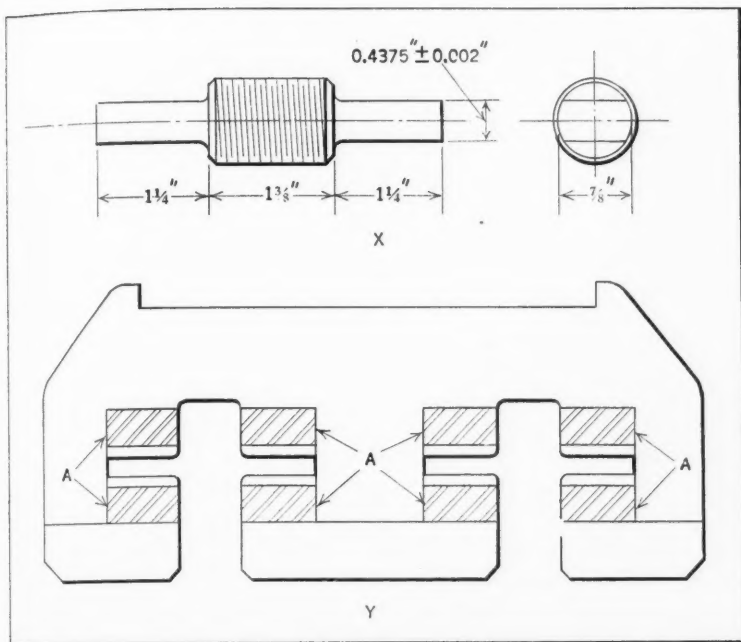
Drawing of a Front Shackle Pin Used in Automobiles Built Without a Front Axle, and Diagram Showing Arrangement of Broaches that Produce the Flat Ends of the Shackle Pin
